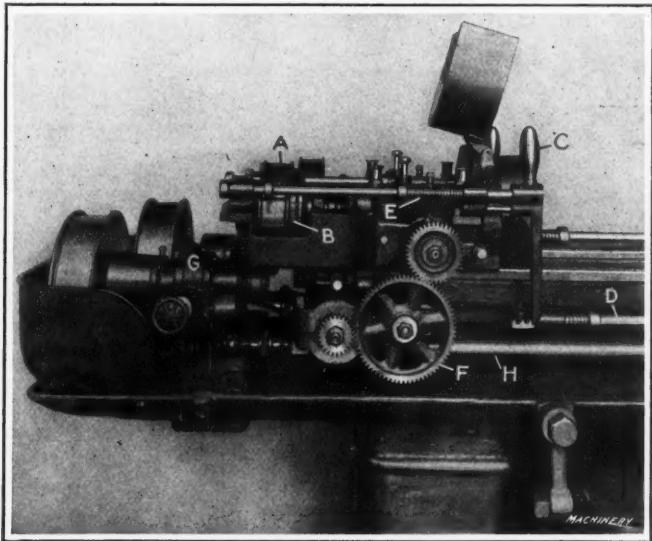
Close View of Driving Mechanism with Gear Guard removed
